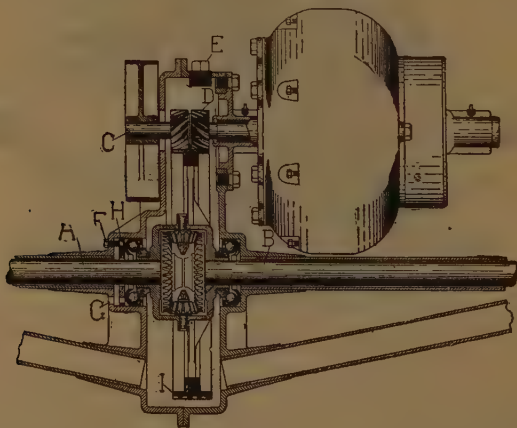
,009.—Diagram of a single motor attached to rear axle through "herringbone" single reducing gears. A, is the left hand section of the divided rear axle; B, the right hand section of the rear axle; C, the brake drum; D, the spiral pinion on the motor shaft driving the worm gear, I, on the differential; E, plug for greasing gears; F, set screw for locking ball race; G, slot for wrench to adjust threaded ring, H, against ball bearings.
